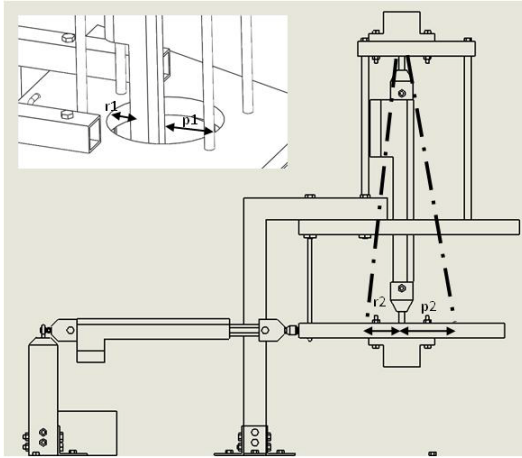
Assembly side view, upper palate isometric view. Available motion for lower palate given horizontally actuated motion.
